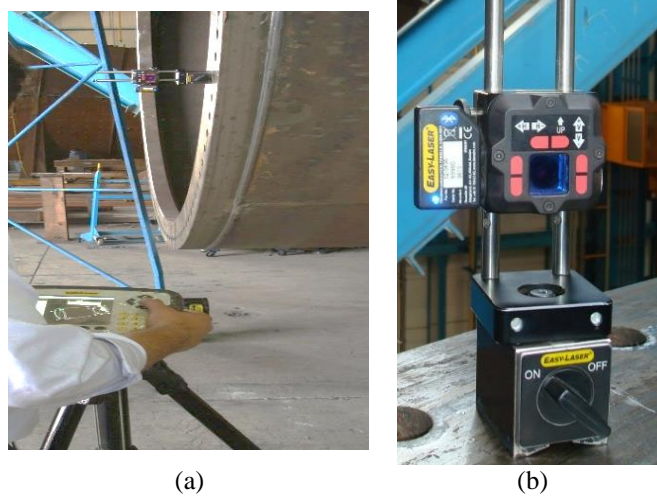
(a) Setting the source and detector, (b) placing the detector on the flange surface
